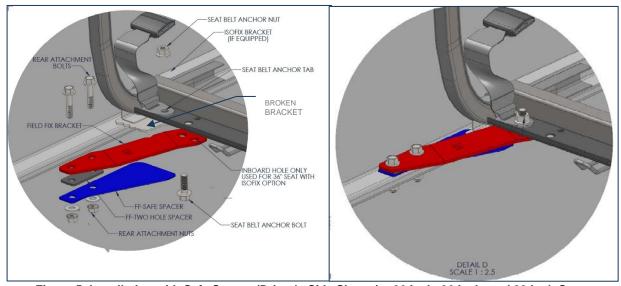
Installation with Safe Spacer (Driver's Side Shown) – 26 Inch, 36 Inch, and 39 Inch Seats
